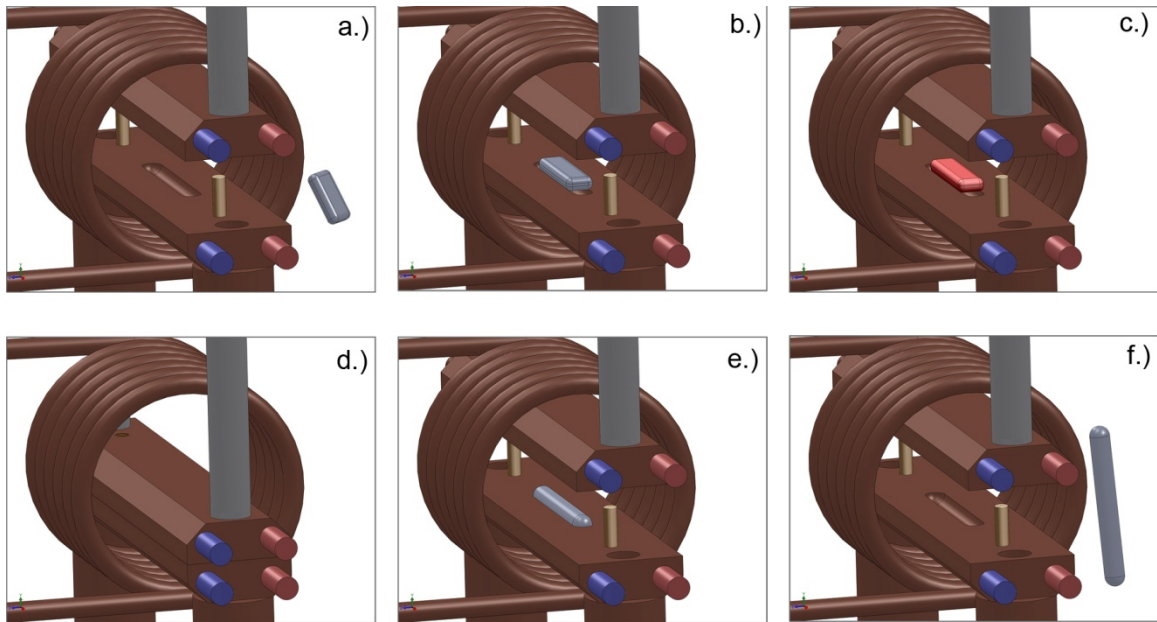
Schematic of semi-solid processing with parallel plate copper mold and induction coil. Blue and red represent ingoing and outgoing cooling water, respectively. (a) an ingot is prepared by arc-melting for the two part cylindrical mold piece. Each copper plate has a semi-cylinder mold machined into it. The brass posts in the bottom plate ensure proper alignment during quenching.. (b) The ingot is placed between the two copper plates. (c) The induction coil is turned on and the alloy is heated up to the two-phase temperature range. (d) Once sufficiently processed, the top copper mold piece is lowered and the coil is turned off. (e) The molten alloy has been pressed into the mold and quenched sufficiently to freeze in the desired microstructure. (f) A semi-solidly processed cylindrical rod is removed from the copper mold.
